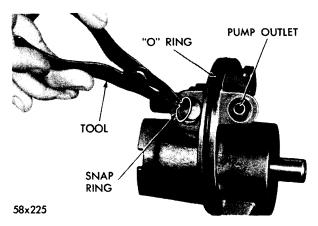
Removing Flow Control Valve Plug Snap Ring
